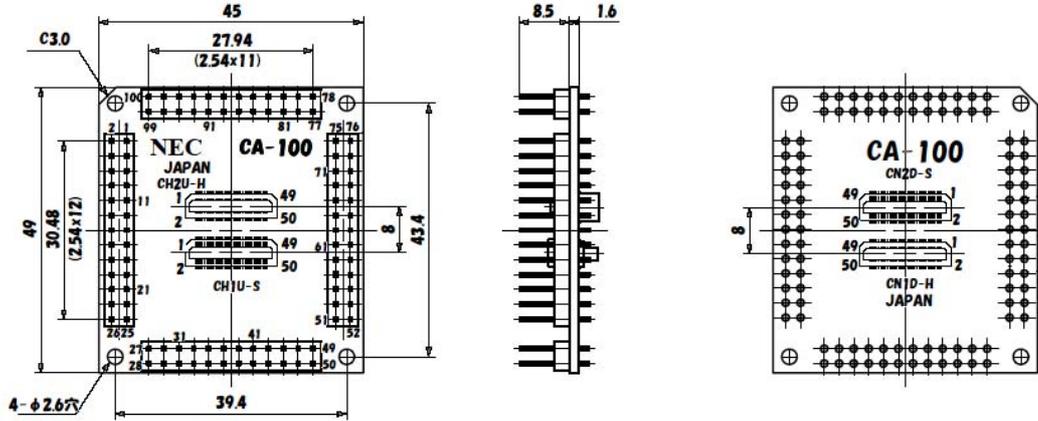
Mount Adapter for 100-pin QFP GF-package
